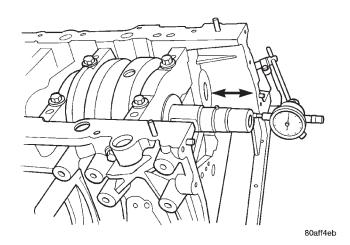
Checking Crankshaft end Play—Typical CRANKSHAFT END PLAY SPECIFICATION CHART
